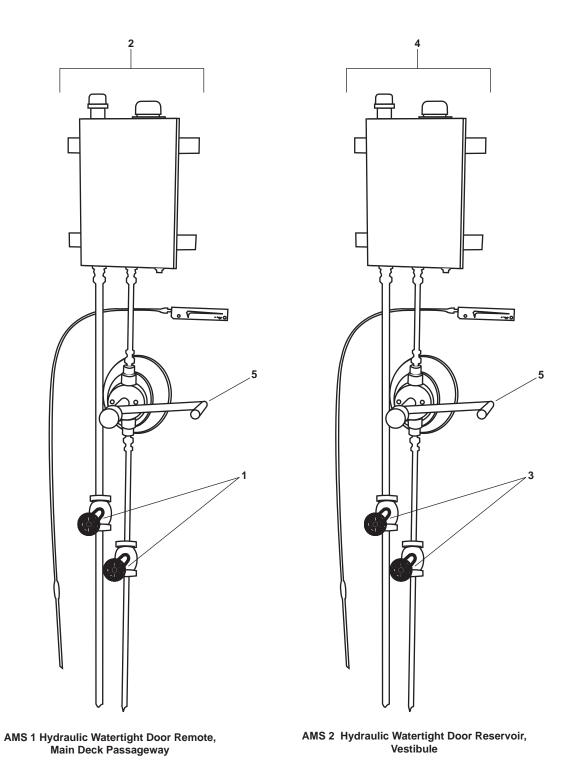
AMS 1 and AMS 2 Control Valve Assemblies
